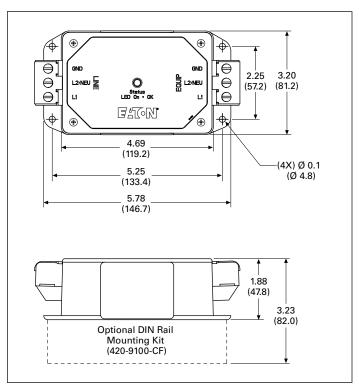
AGCNxxx30 Dimensions in Inches (mm)
